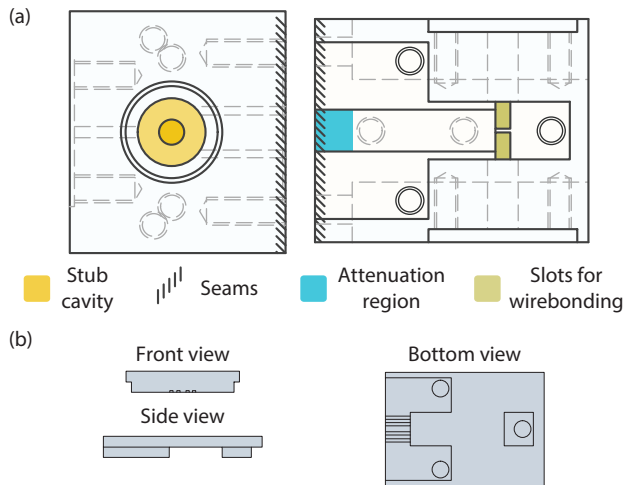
Design of the superconducting package. (a) Top view of the main body and the bottom clamp. (b) Design of the top clamp with engineered constrictions.
